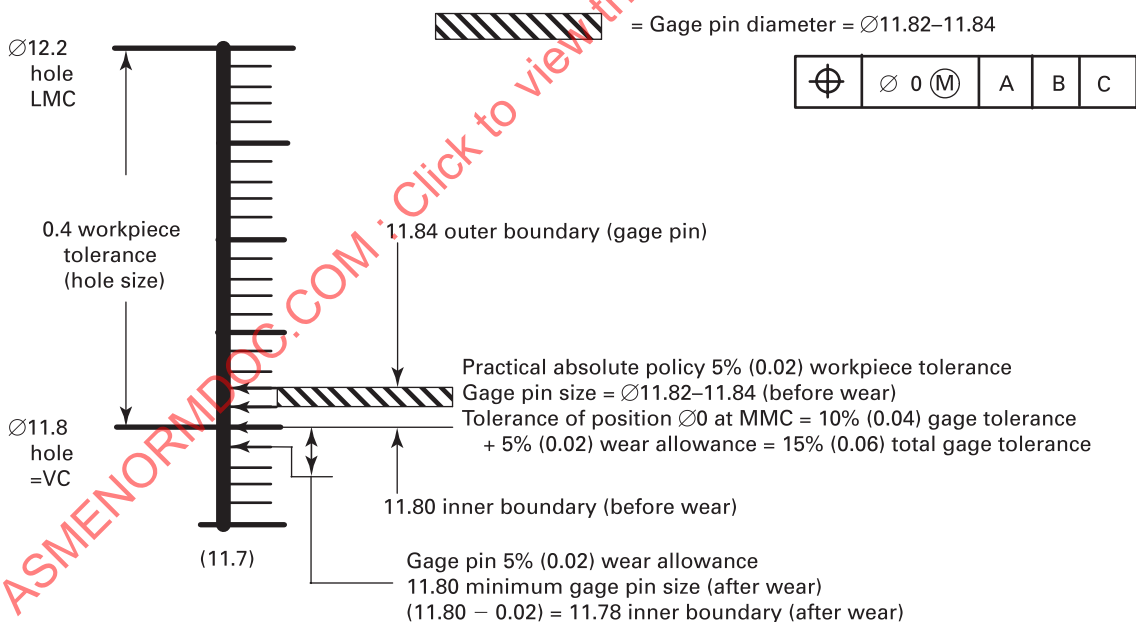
(c) Practical Absolute — Direct Percentage Tolerance Method
